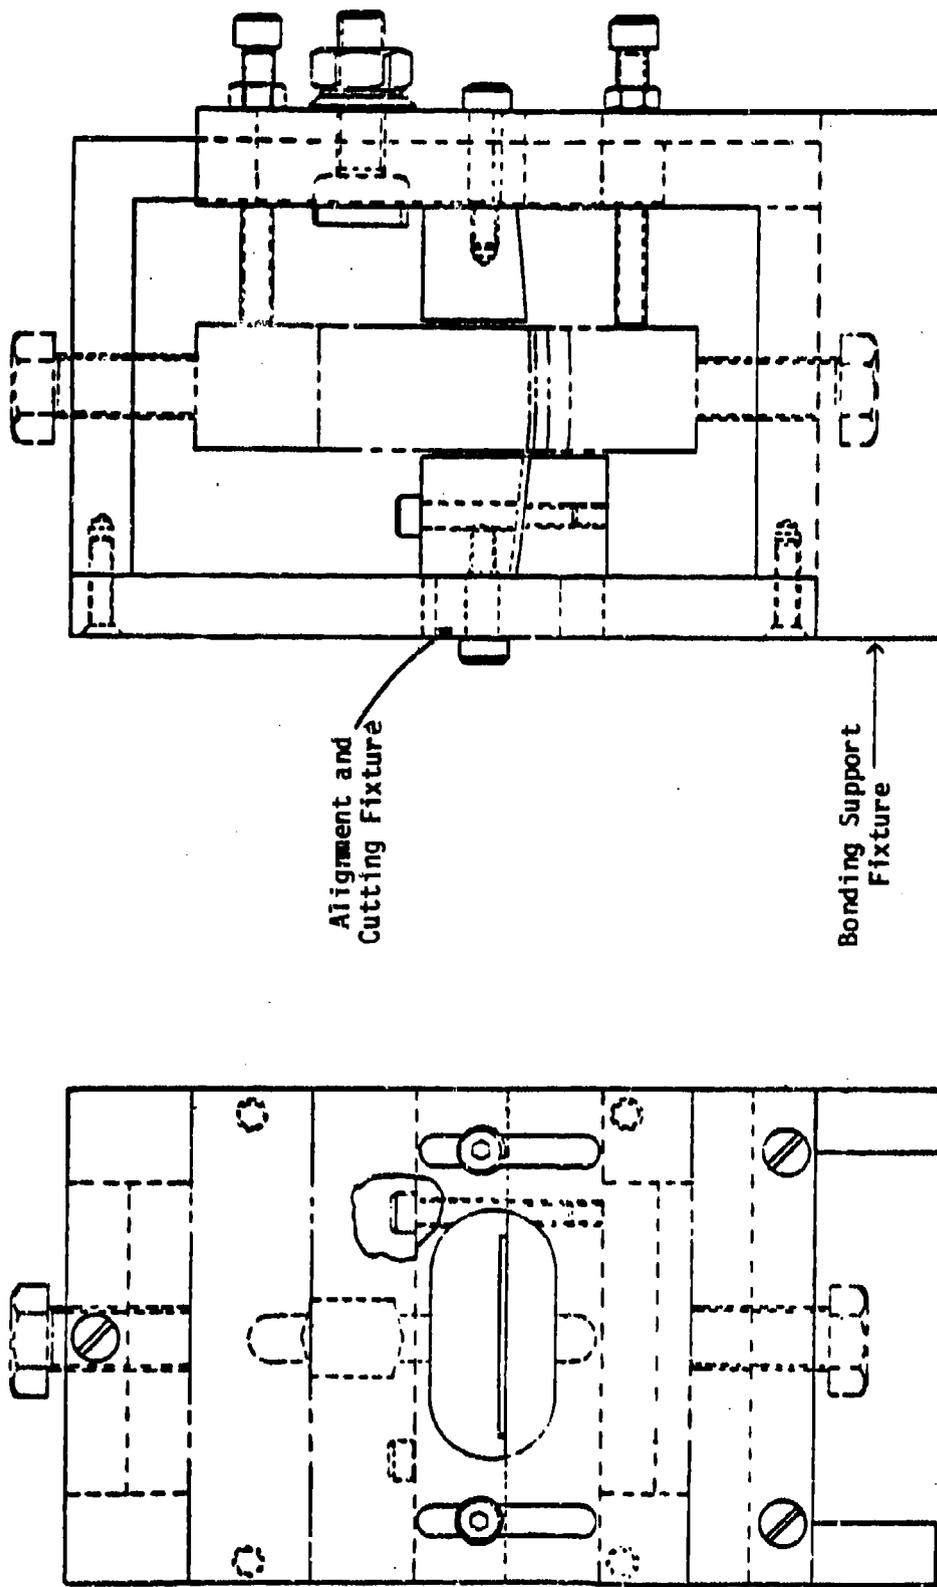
Bonding Support, Alignment and Cutting Fixture for Motor Specimens
